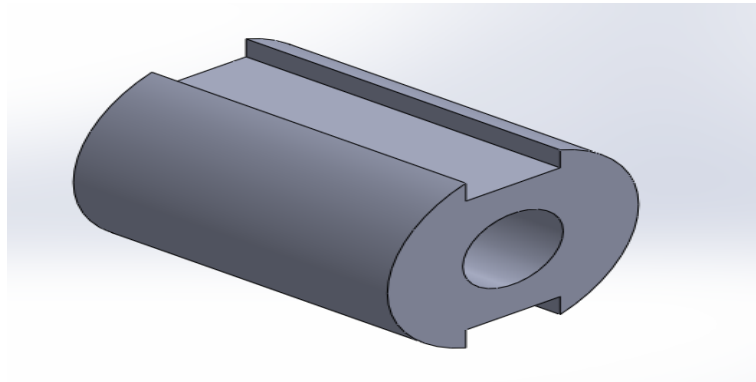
3-D design of brass piece to hold the PCB stick with sample probe. This is attached permanently to sample probe
